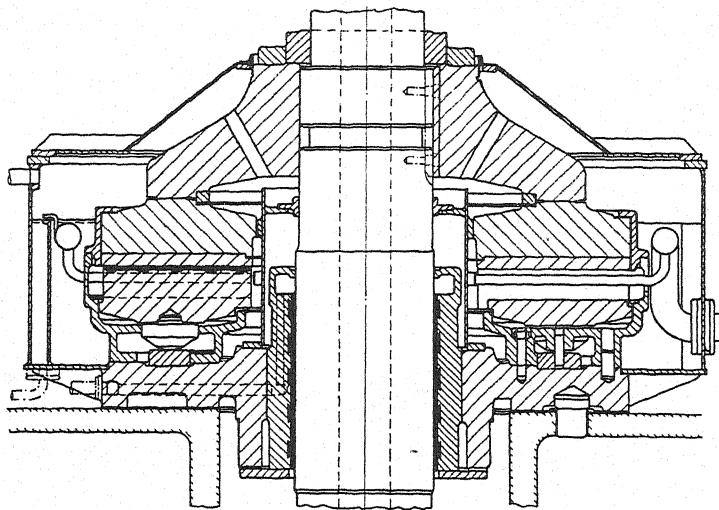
Single-Collar Pad Thrust Bearing for a Water Turbine
